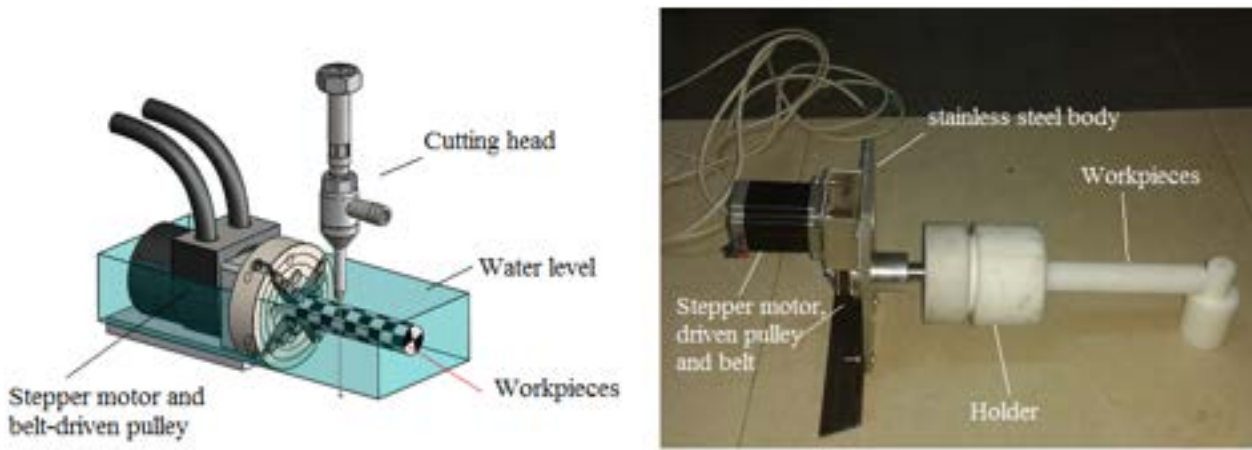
A schematic and prototype view of the developed turning mechanism.
